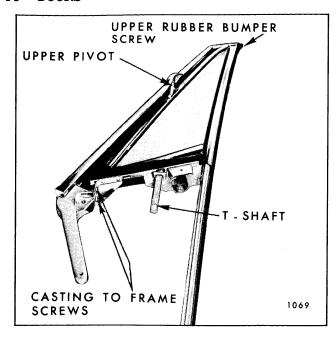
Front Door Ventilator - "B & C" Styles
